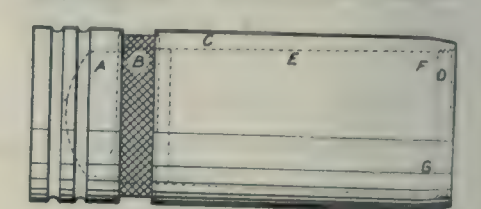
SHRAPNEL SHELL FOR MACHINING ON SCREW MACHINE. Operations:—Feed stock; rough holes A and B; turn C and groove; finish hole A; counter-bore D; ream taper E; tap F; face end G; finish hole B; knurl H; cut-off I.
